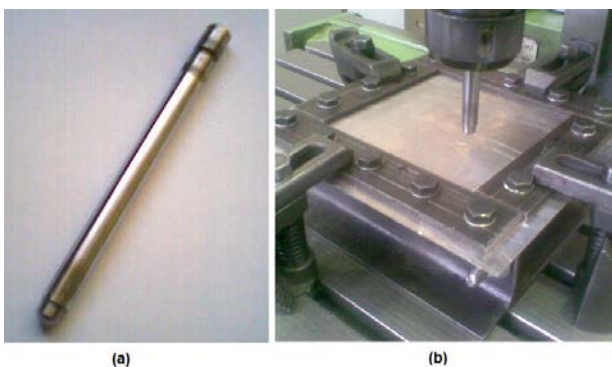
(a) Hemispherical tool, (b) Experimental Setup for SPIF
